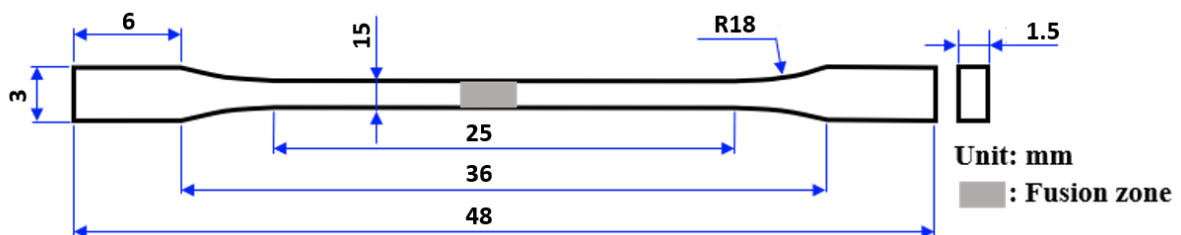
Geometry and dimensions of specimens used for uniaxial tensile testing.
